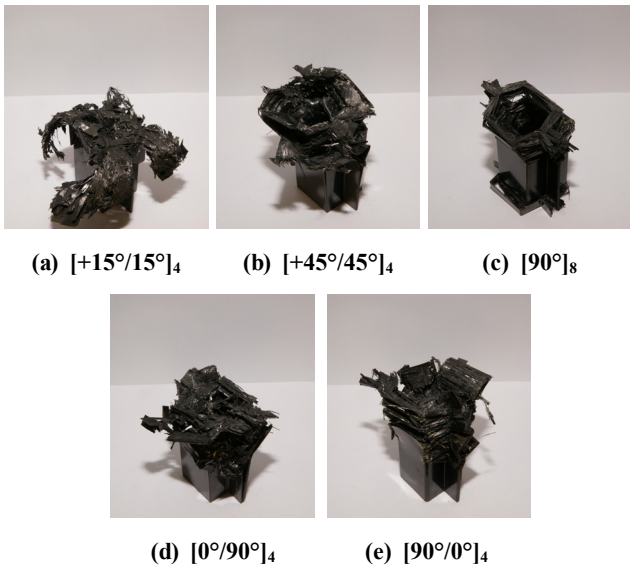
Collapse modes of CFRP double hat shaped structural member
